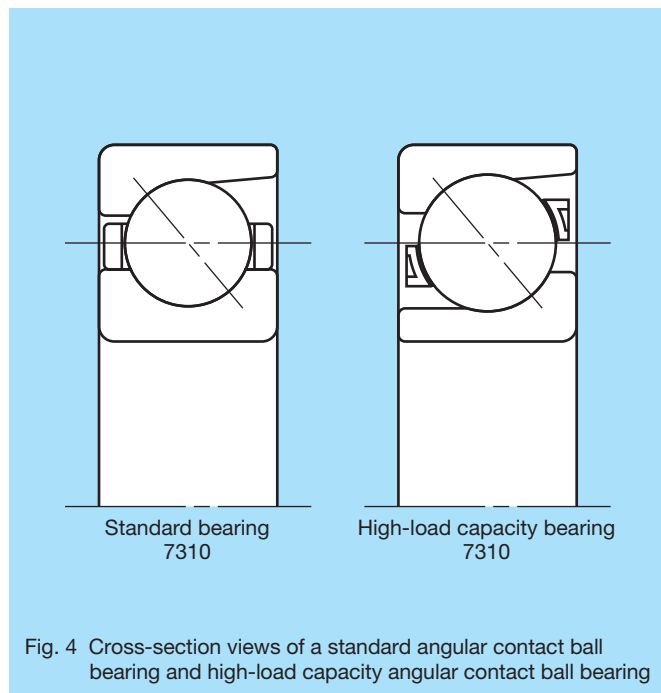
Cross-section views of a standard angular contact ball bearing and high-load capacity angular contact ball bearing
